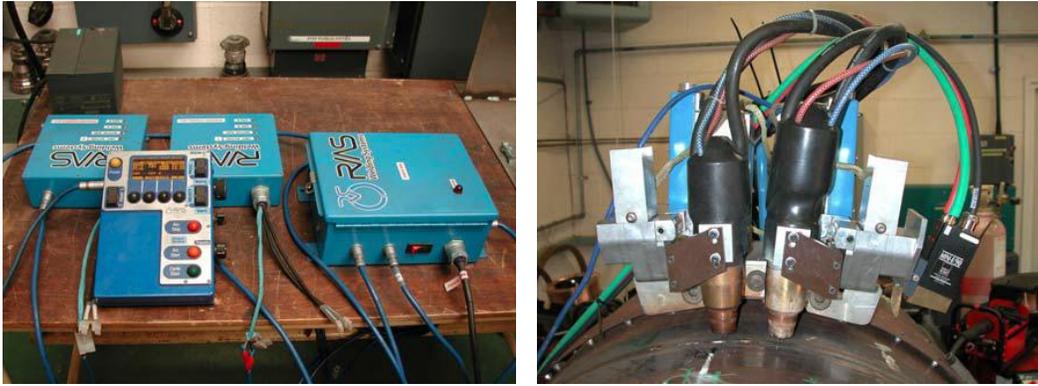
RMS MOW II Welding System Control Switching Boxes and Dual Torch Bug with Cranfield WERC Tandem Torches
